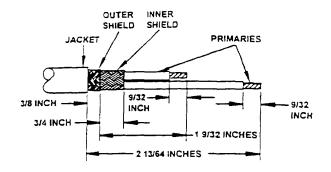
Single Shield Cable Repair with Mini-Seal Crimp Primary Splice (Sheet 3)
